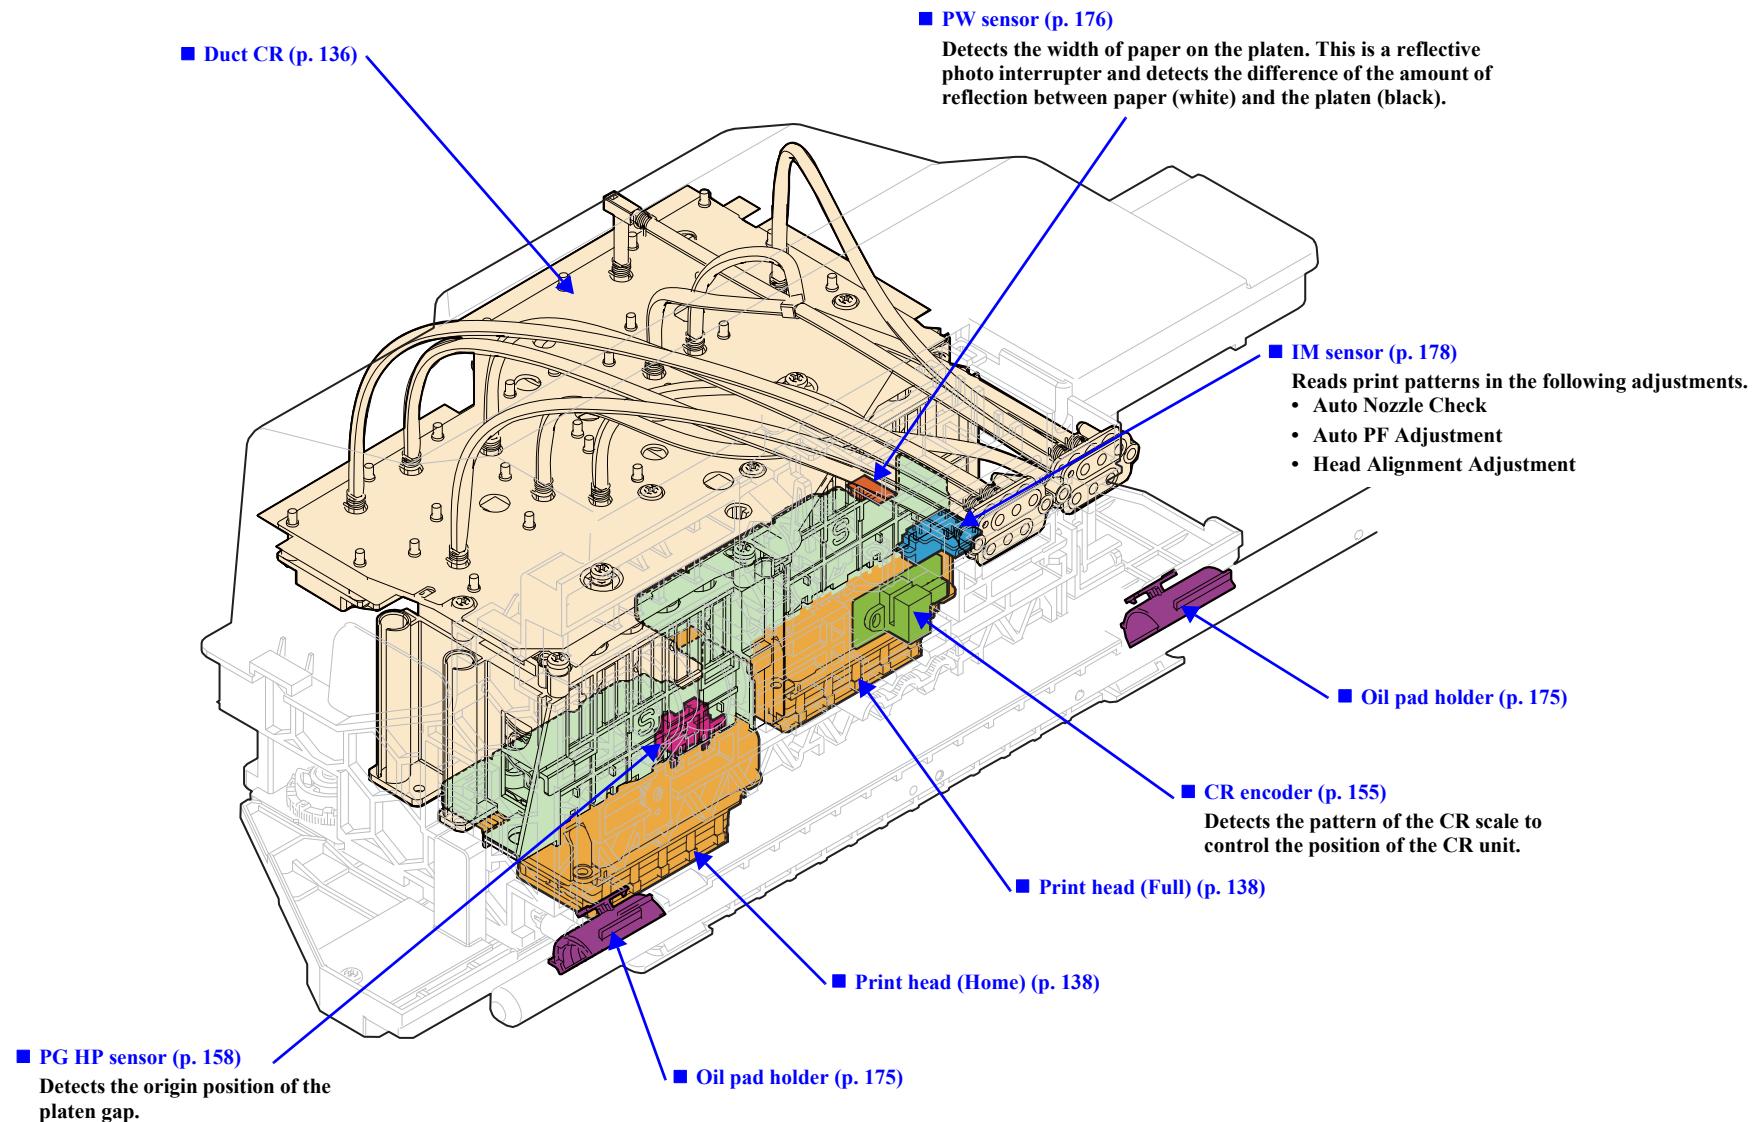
Carriage Mechanism/Ink System Mechanism
